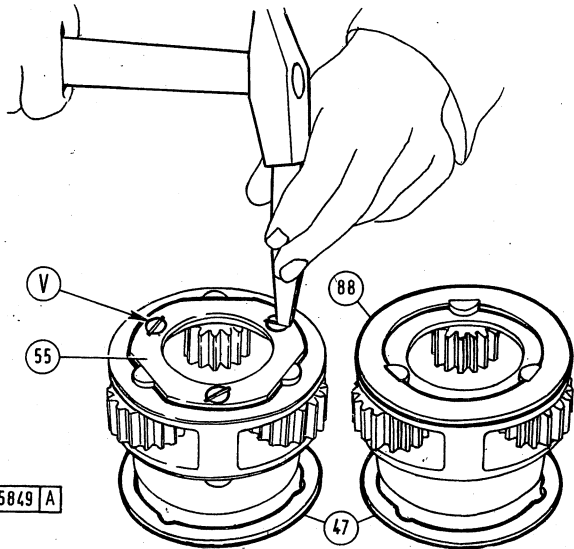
Punch locking the flat head screws (V) securing the epicyclic unit drive gears shaft retainer disc (55).
